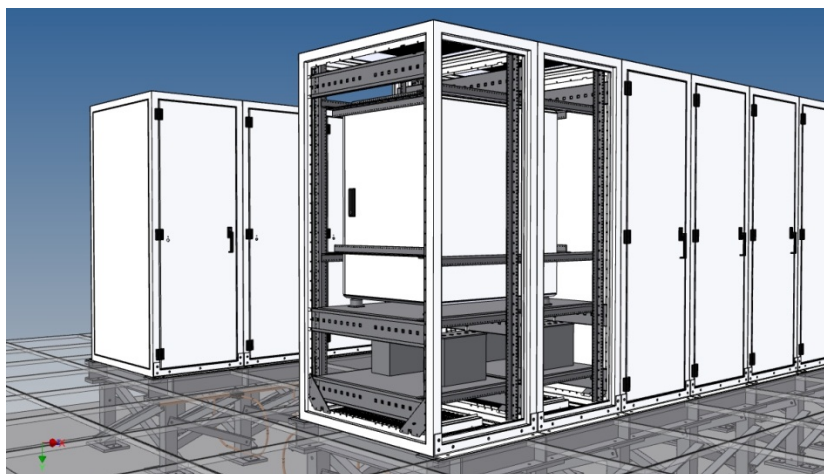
HMaser Assembly. The iMaser is shown inside the seismic rack with backup batteries below
